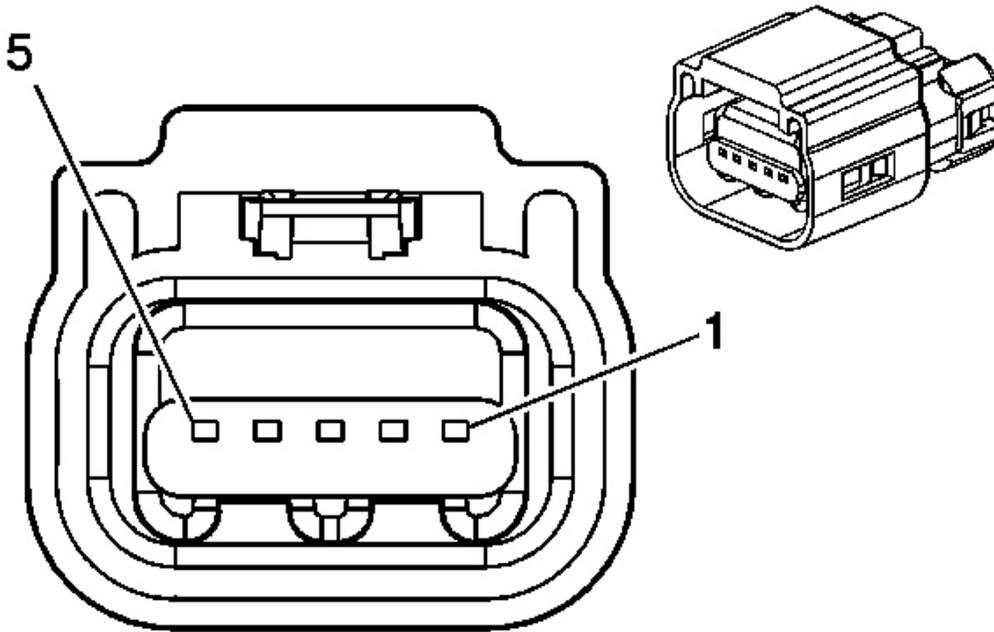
Transfer Case Shift Control Module X1 Connector End View
